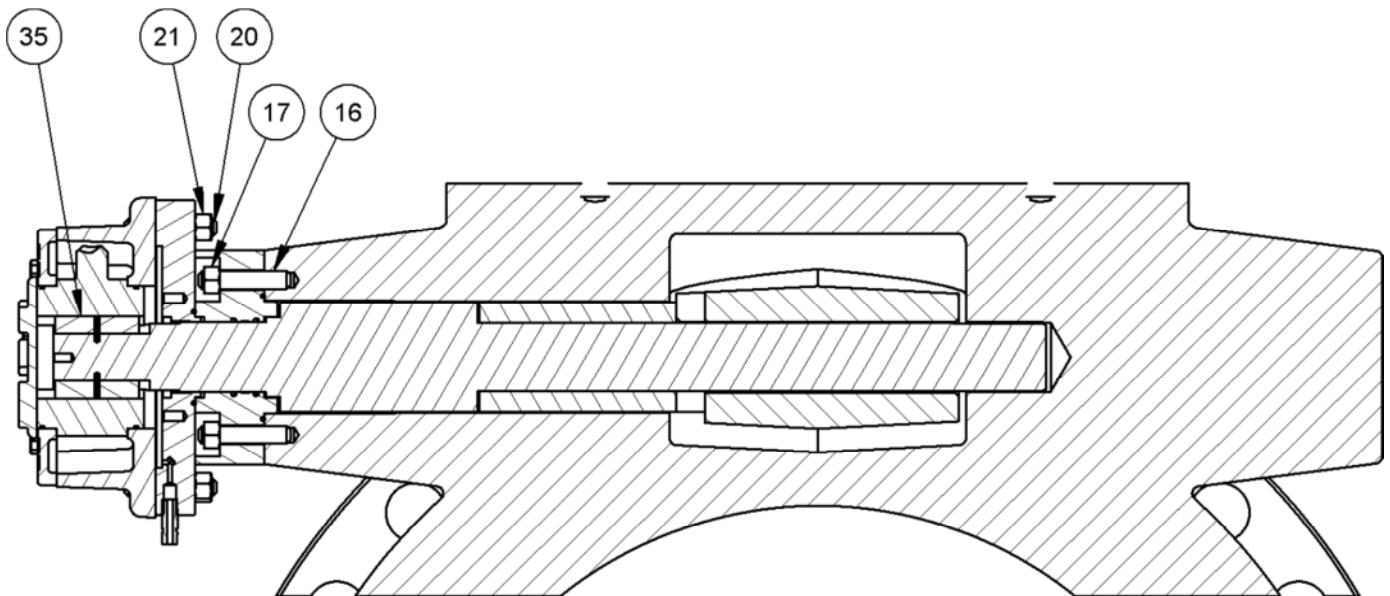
Cross sectional view of gland assembly (at 90°) shown
